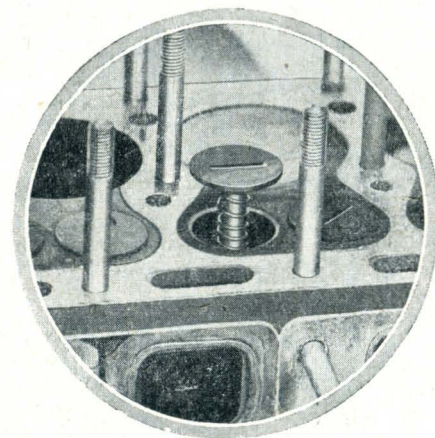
SHOWING USE OF SPRING TO FACILITATE VALVE GRINDING
